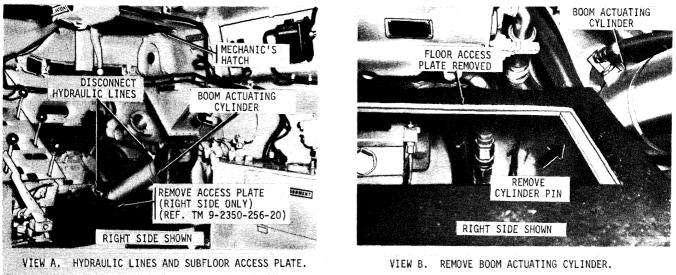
Boom actuating cylinders -Removal and installation access to right side.
